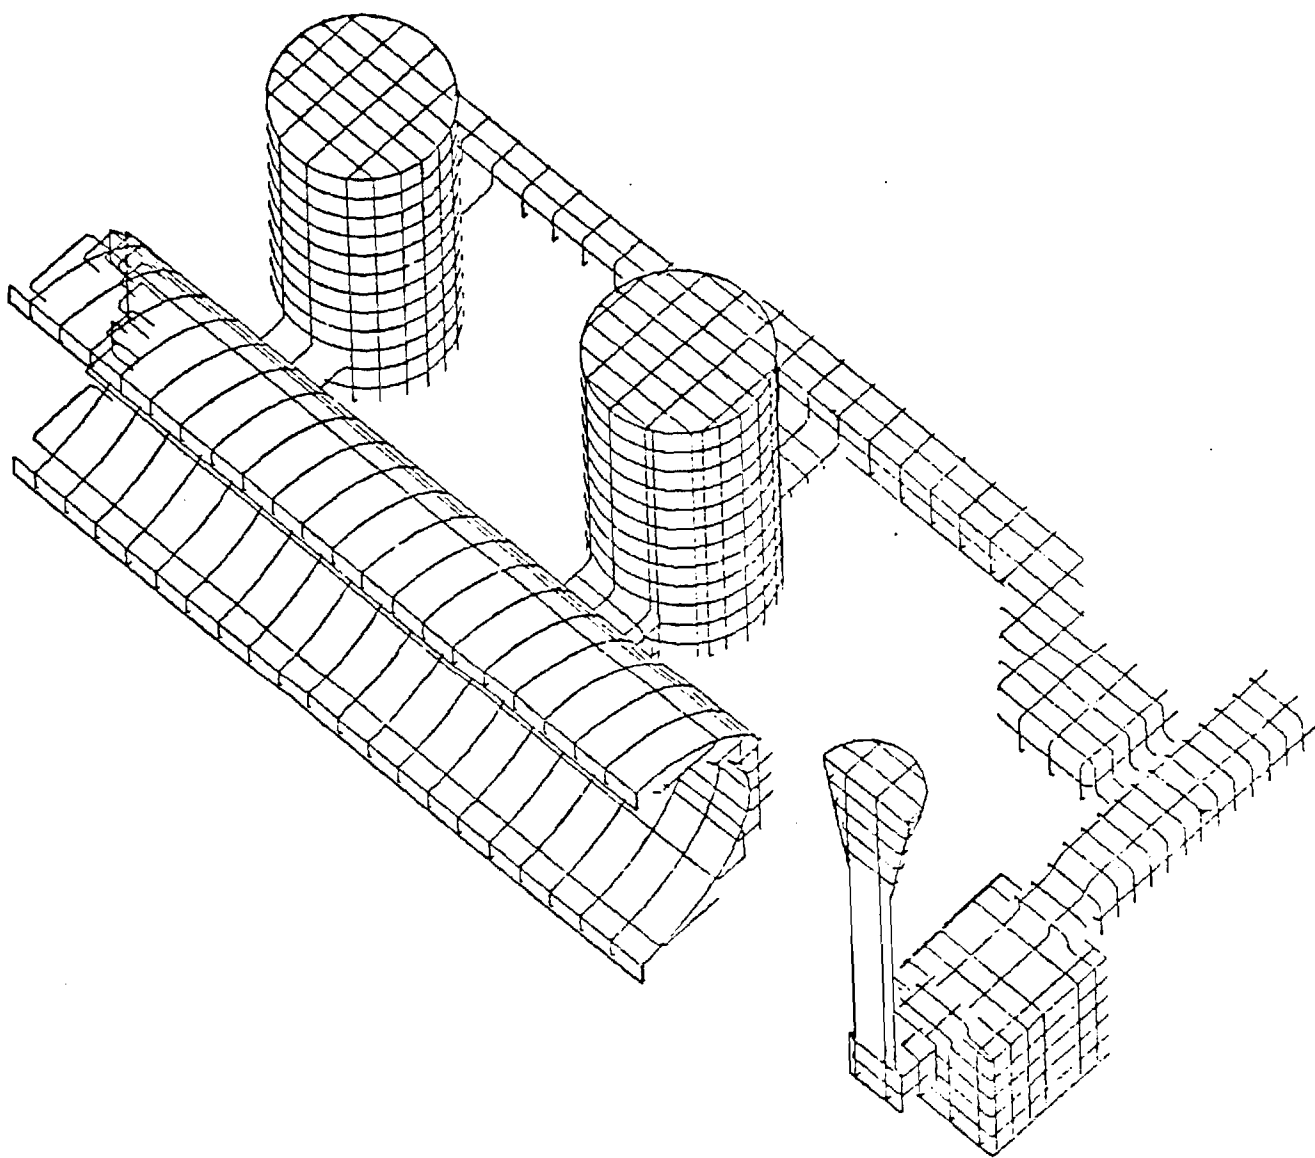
Machinability Test Piece with Commercial Foundry Rigging,
